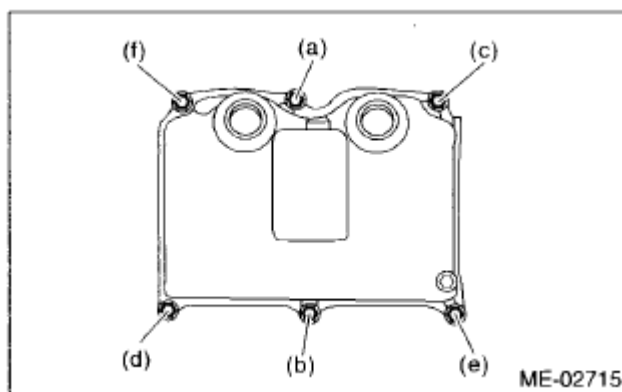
Identifying Rocker Cover Bolts - RH Side Tightening Sequence
